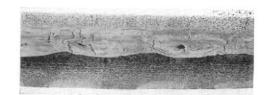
Cracking in weld, due to inadequate mixing.
